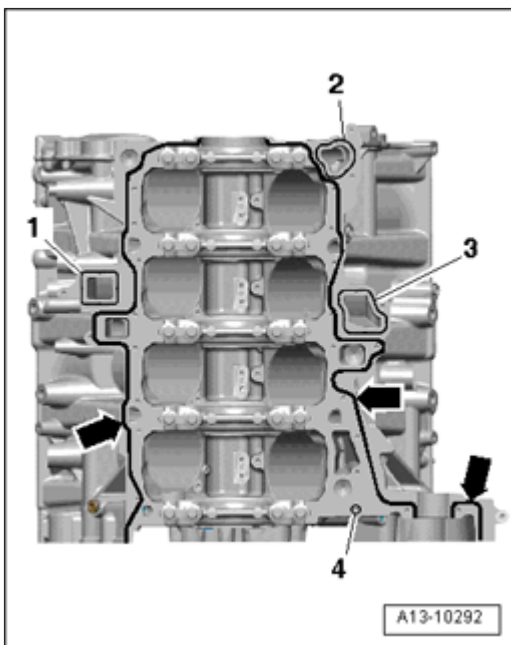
Sealant Applied On Cylinder Block (For Guide Frame)
